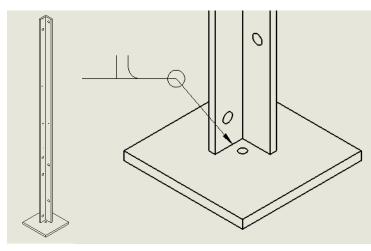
Corner weld the base leg angle iron to the mounting plate to assemble to base legs.
